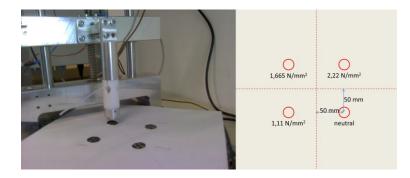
Anode-to-cathode-system (left), welding spot location and contact pressure (right)
